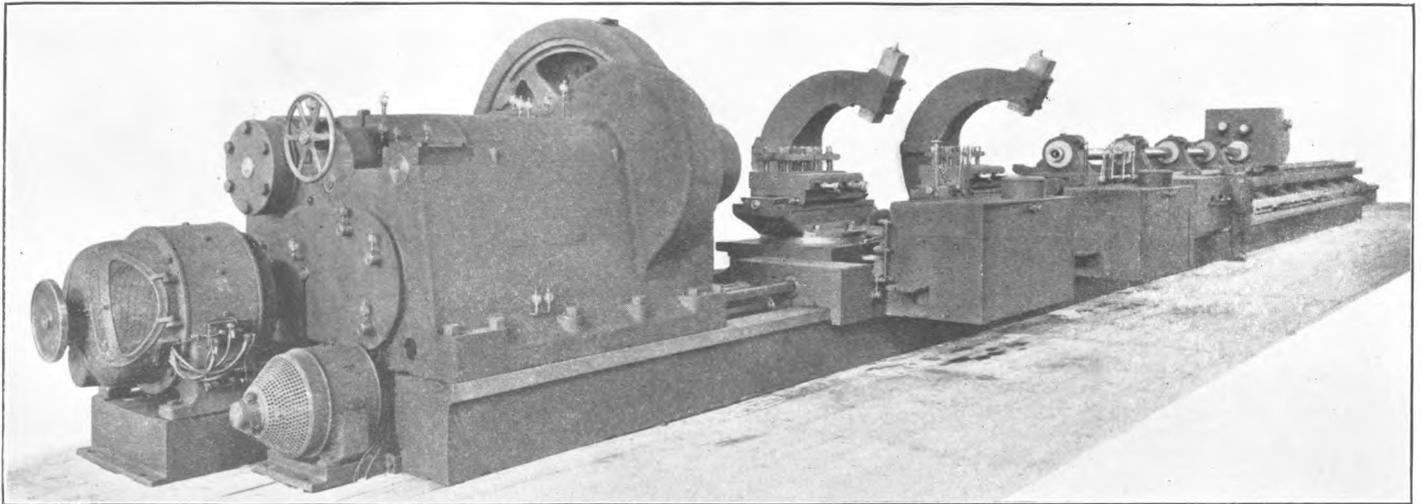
LARGE GUN LATHE, WITH GUARDED GEARS.
